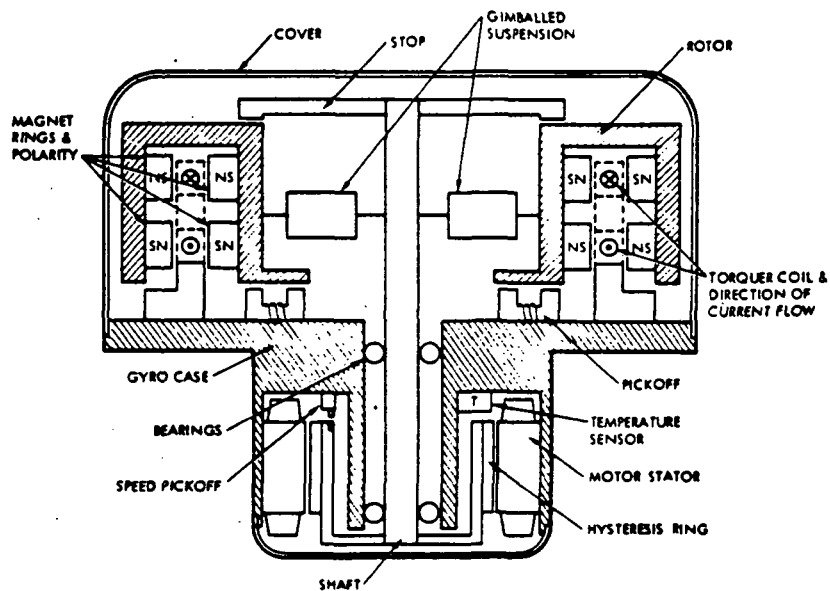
Cross-section of SDG-5 dry tuned gyro [GOV-1]
